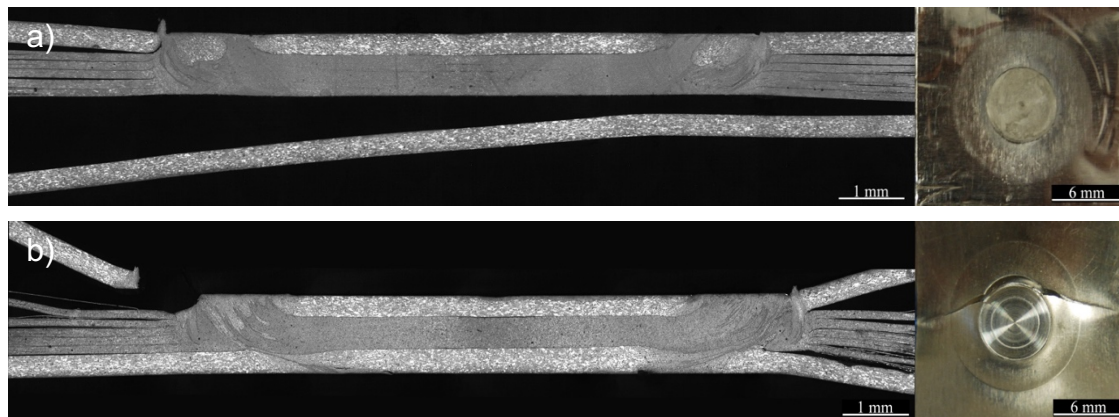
Example of a tested lap shear specimen surfaces and cross-sections of the fractured welds showing (a, c) eyebrow pull-out and (b, d) bottom sheet through-the-weld fracture.
